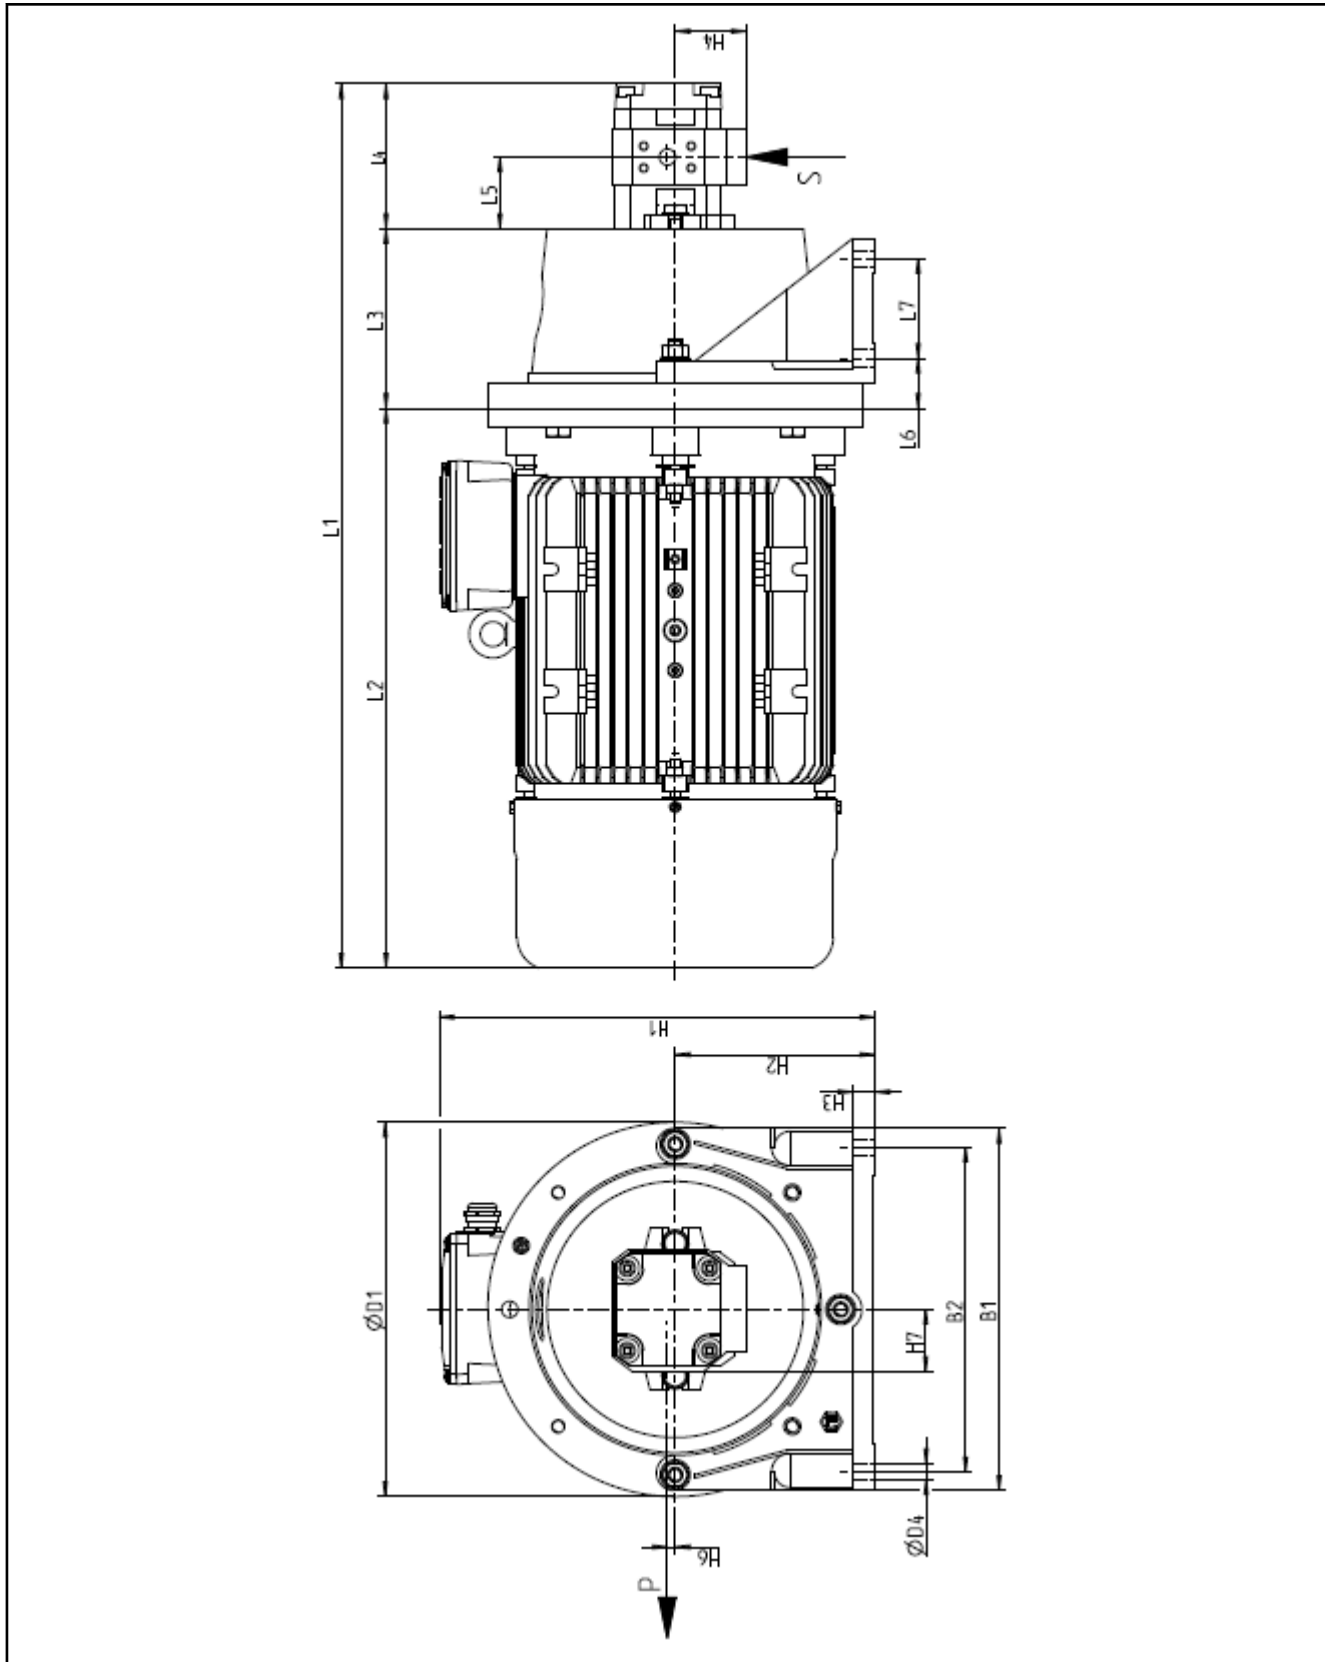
Dimension sheet "MPES2" with "PGH2" in the fastening mode "B" (horizontal foot fastening)
